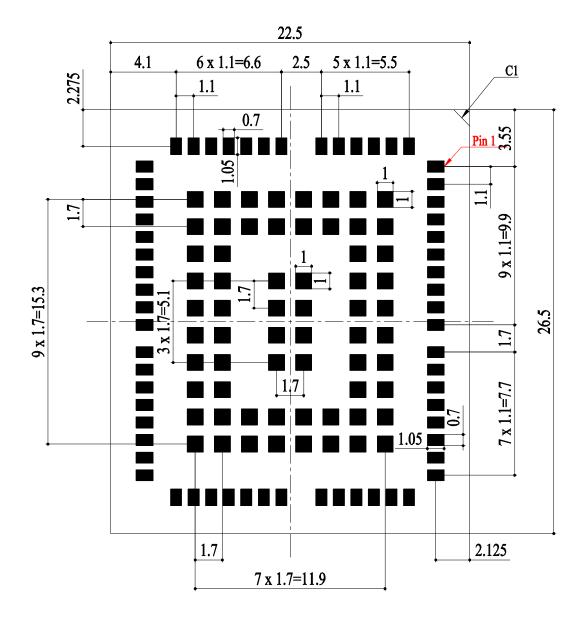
EG916Q-GL Bottom Dimensions (Bottom View, Unit: mm)
